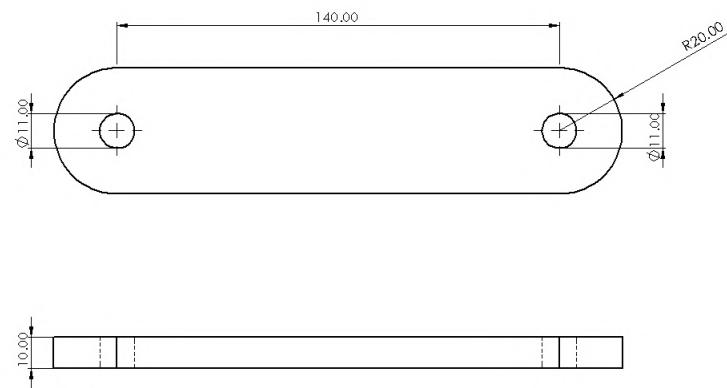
2D Drawing of the long link (All dimensions are in mm)
